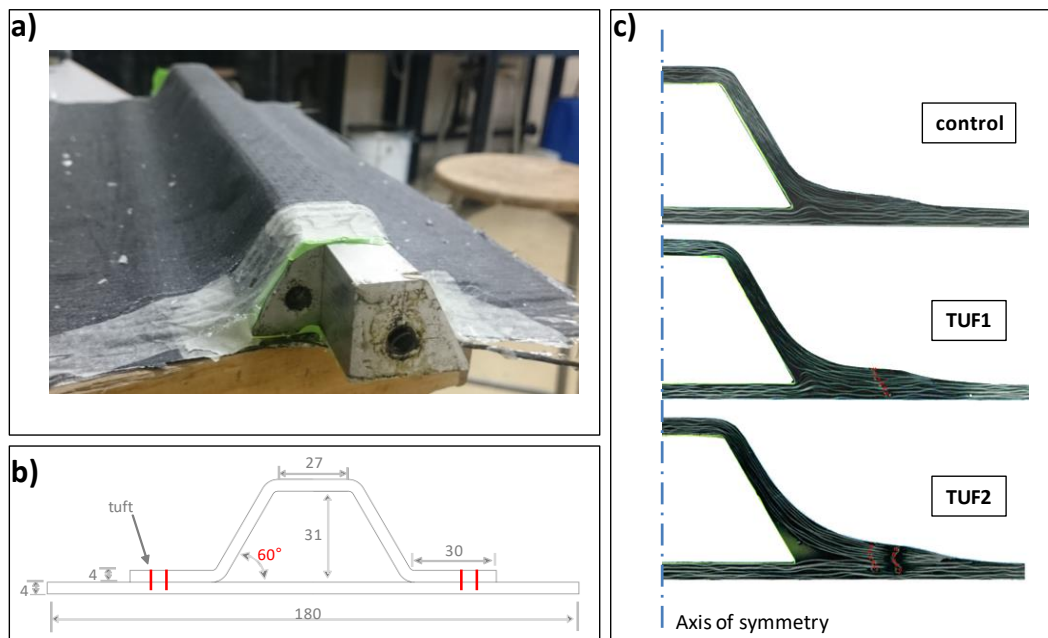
a) Mold releasing of the bi-parts mold from the specimens, b) final dimensions of the samples and, c) the laminated composites specimens.
